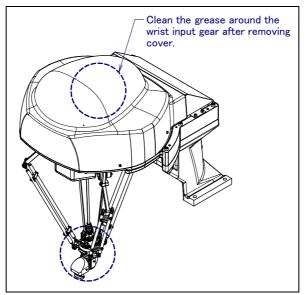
(a) Cleaning points of the wrist axis rotation parts and the wrist gear
